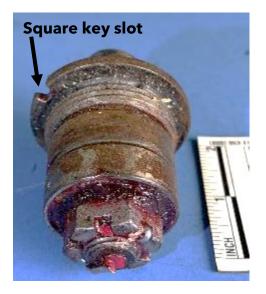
As-received eye bolt assembly showing the bottom end of roller bearing assembly that was covered with translucent red grease.
